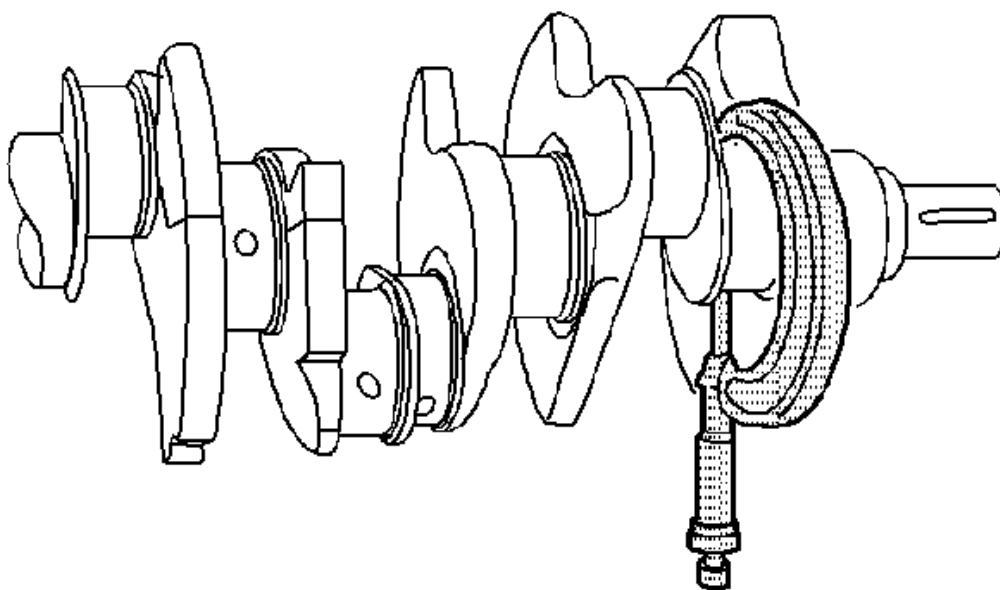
Measuring Crankshaft Bearing Journal Diameter
